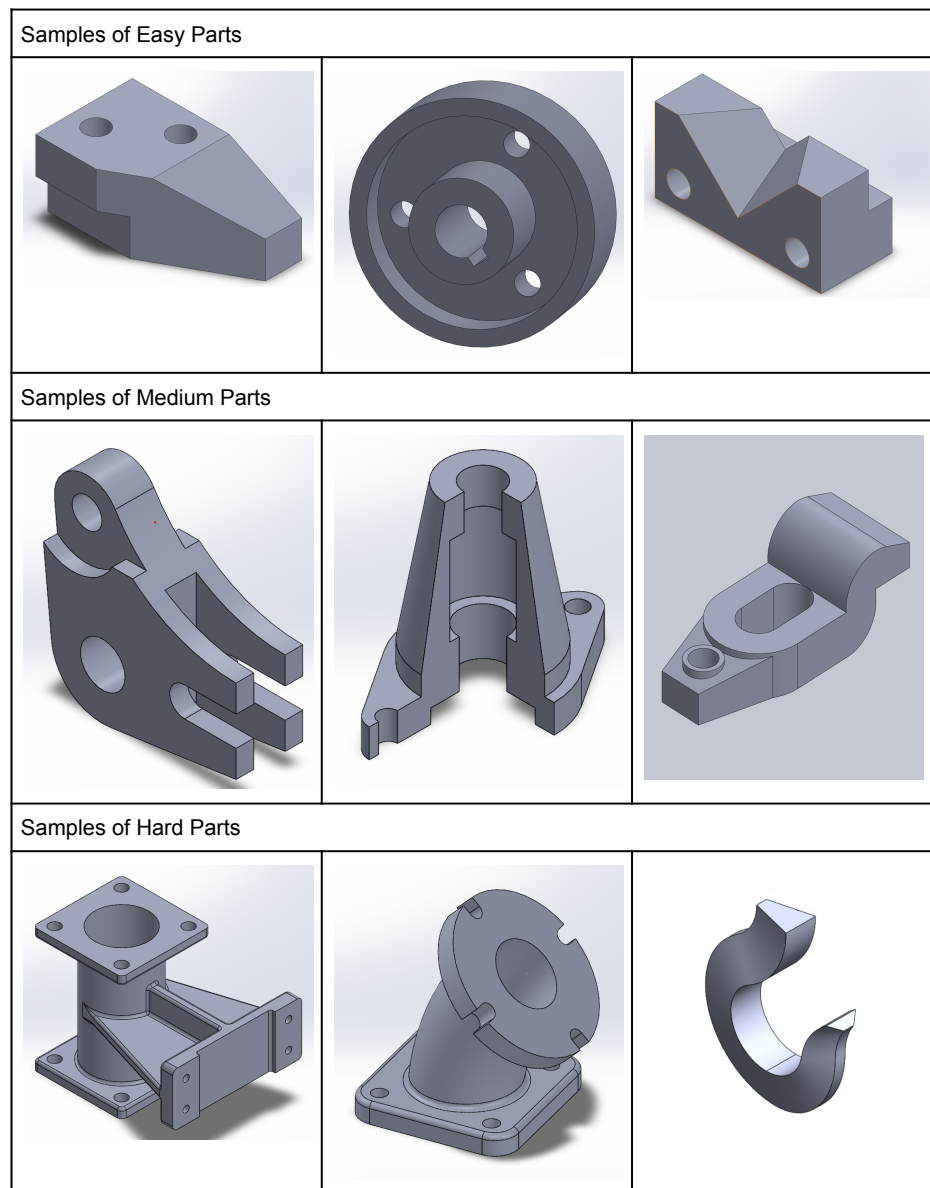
Samples of *easy* parts, *medium* parts and *hard* parts
